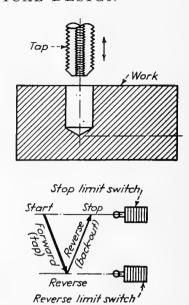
Accurate positioning of reversing and stop limits is necessary on tapping machines especially when tapping blind holes. Special alternating-current reversing motors for tapping service permit as many as 60 reversals per min. The use of two- or four-speed motors reduces the number of gear changes required. Accurate limit switches, quick-acting contactors, and high torque motors are used. A plug stop is used for braking at the "out" position.
